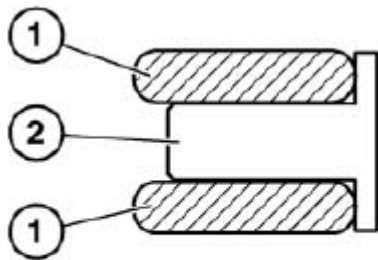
Identifying Piston Support Spring And Steel Band Rings
